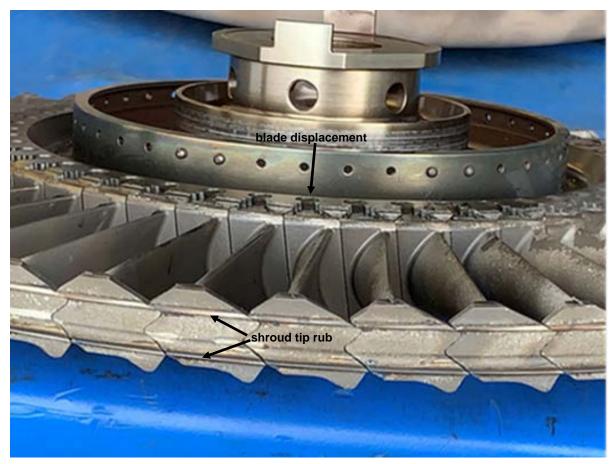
S1 PT disk assembly showing blade displacement and shroud tip rub
